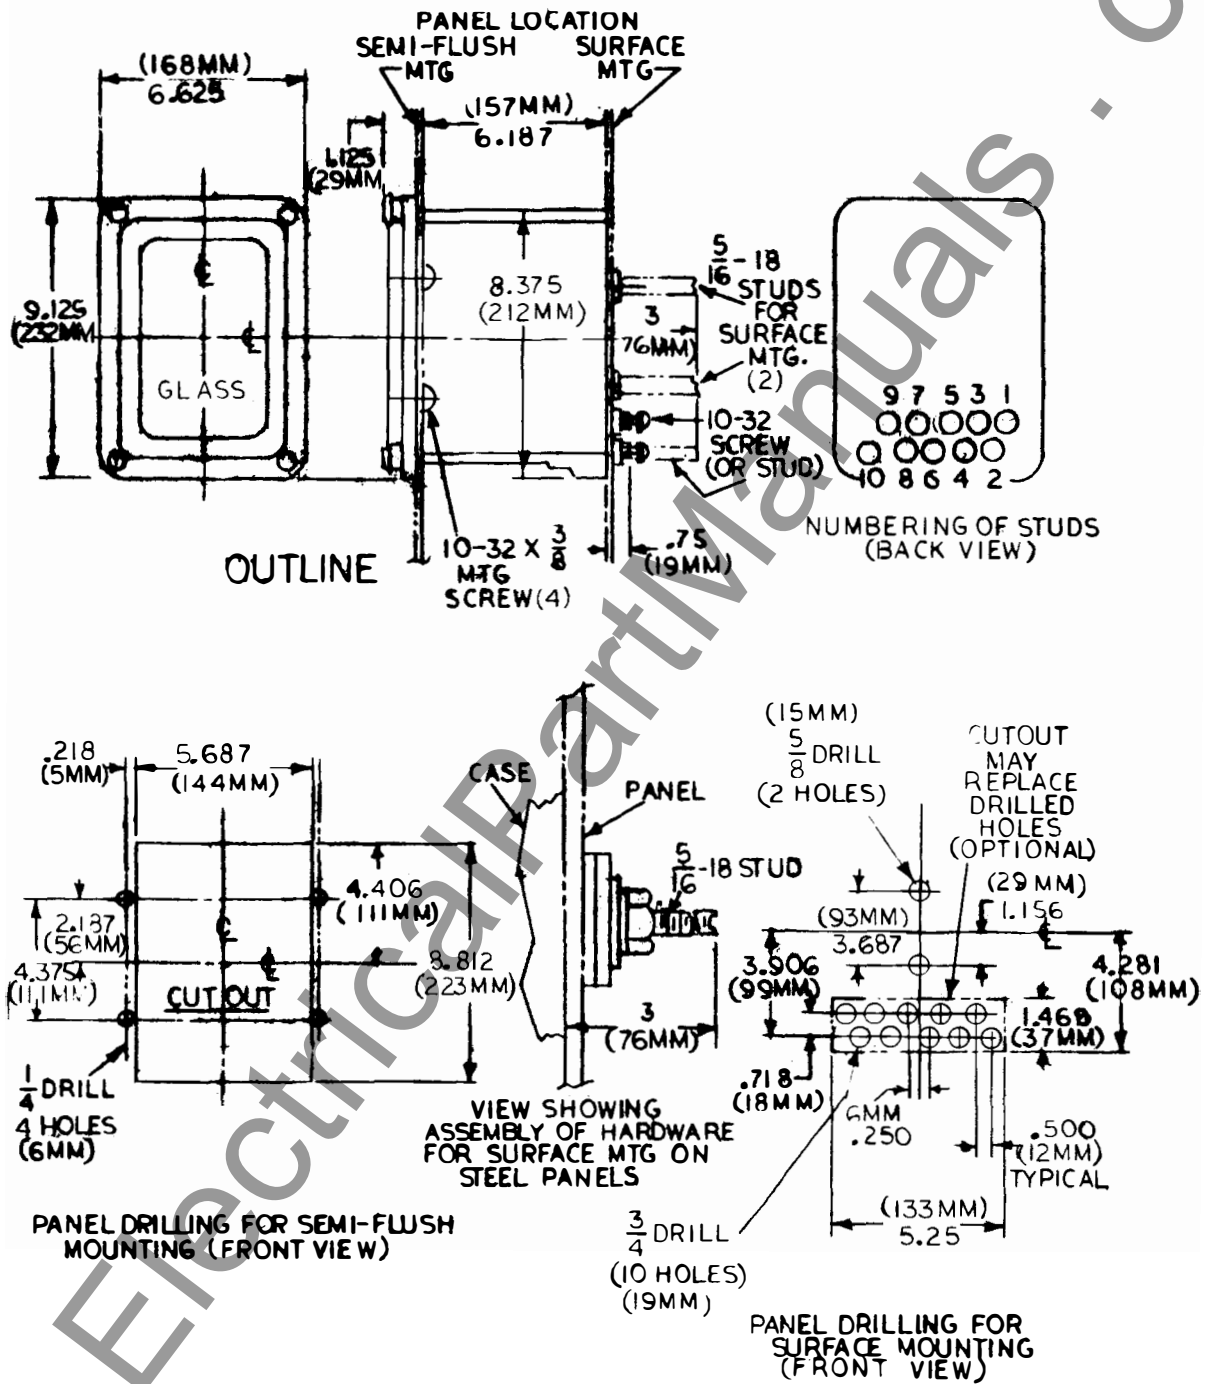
Outline And Panel Drilling Dimensions For Type ICW Relays
